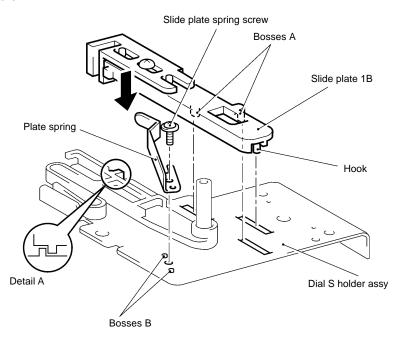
Reassembling the Dial Switch Holder Assy B (3)
